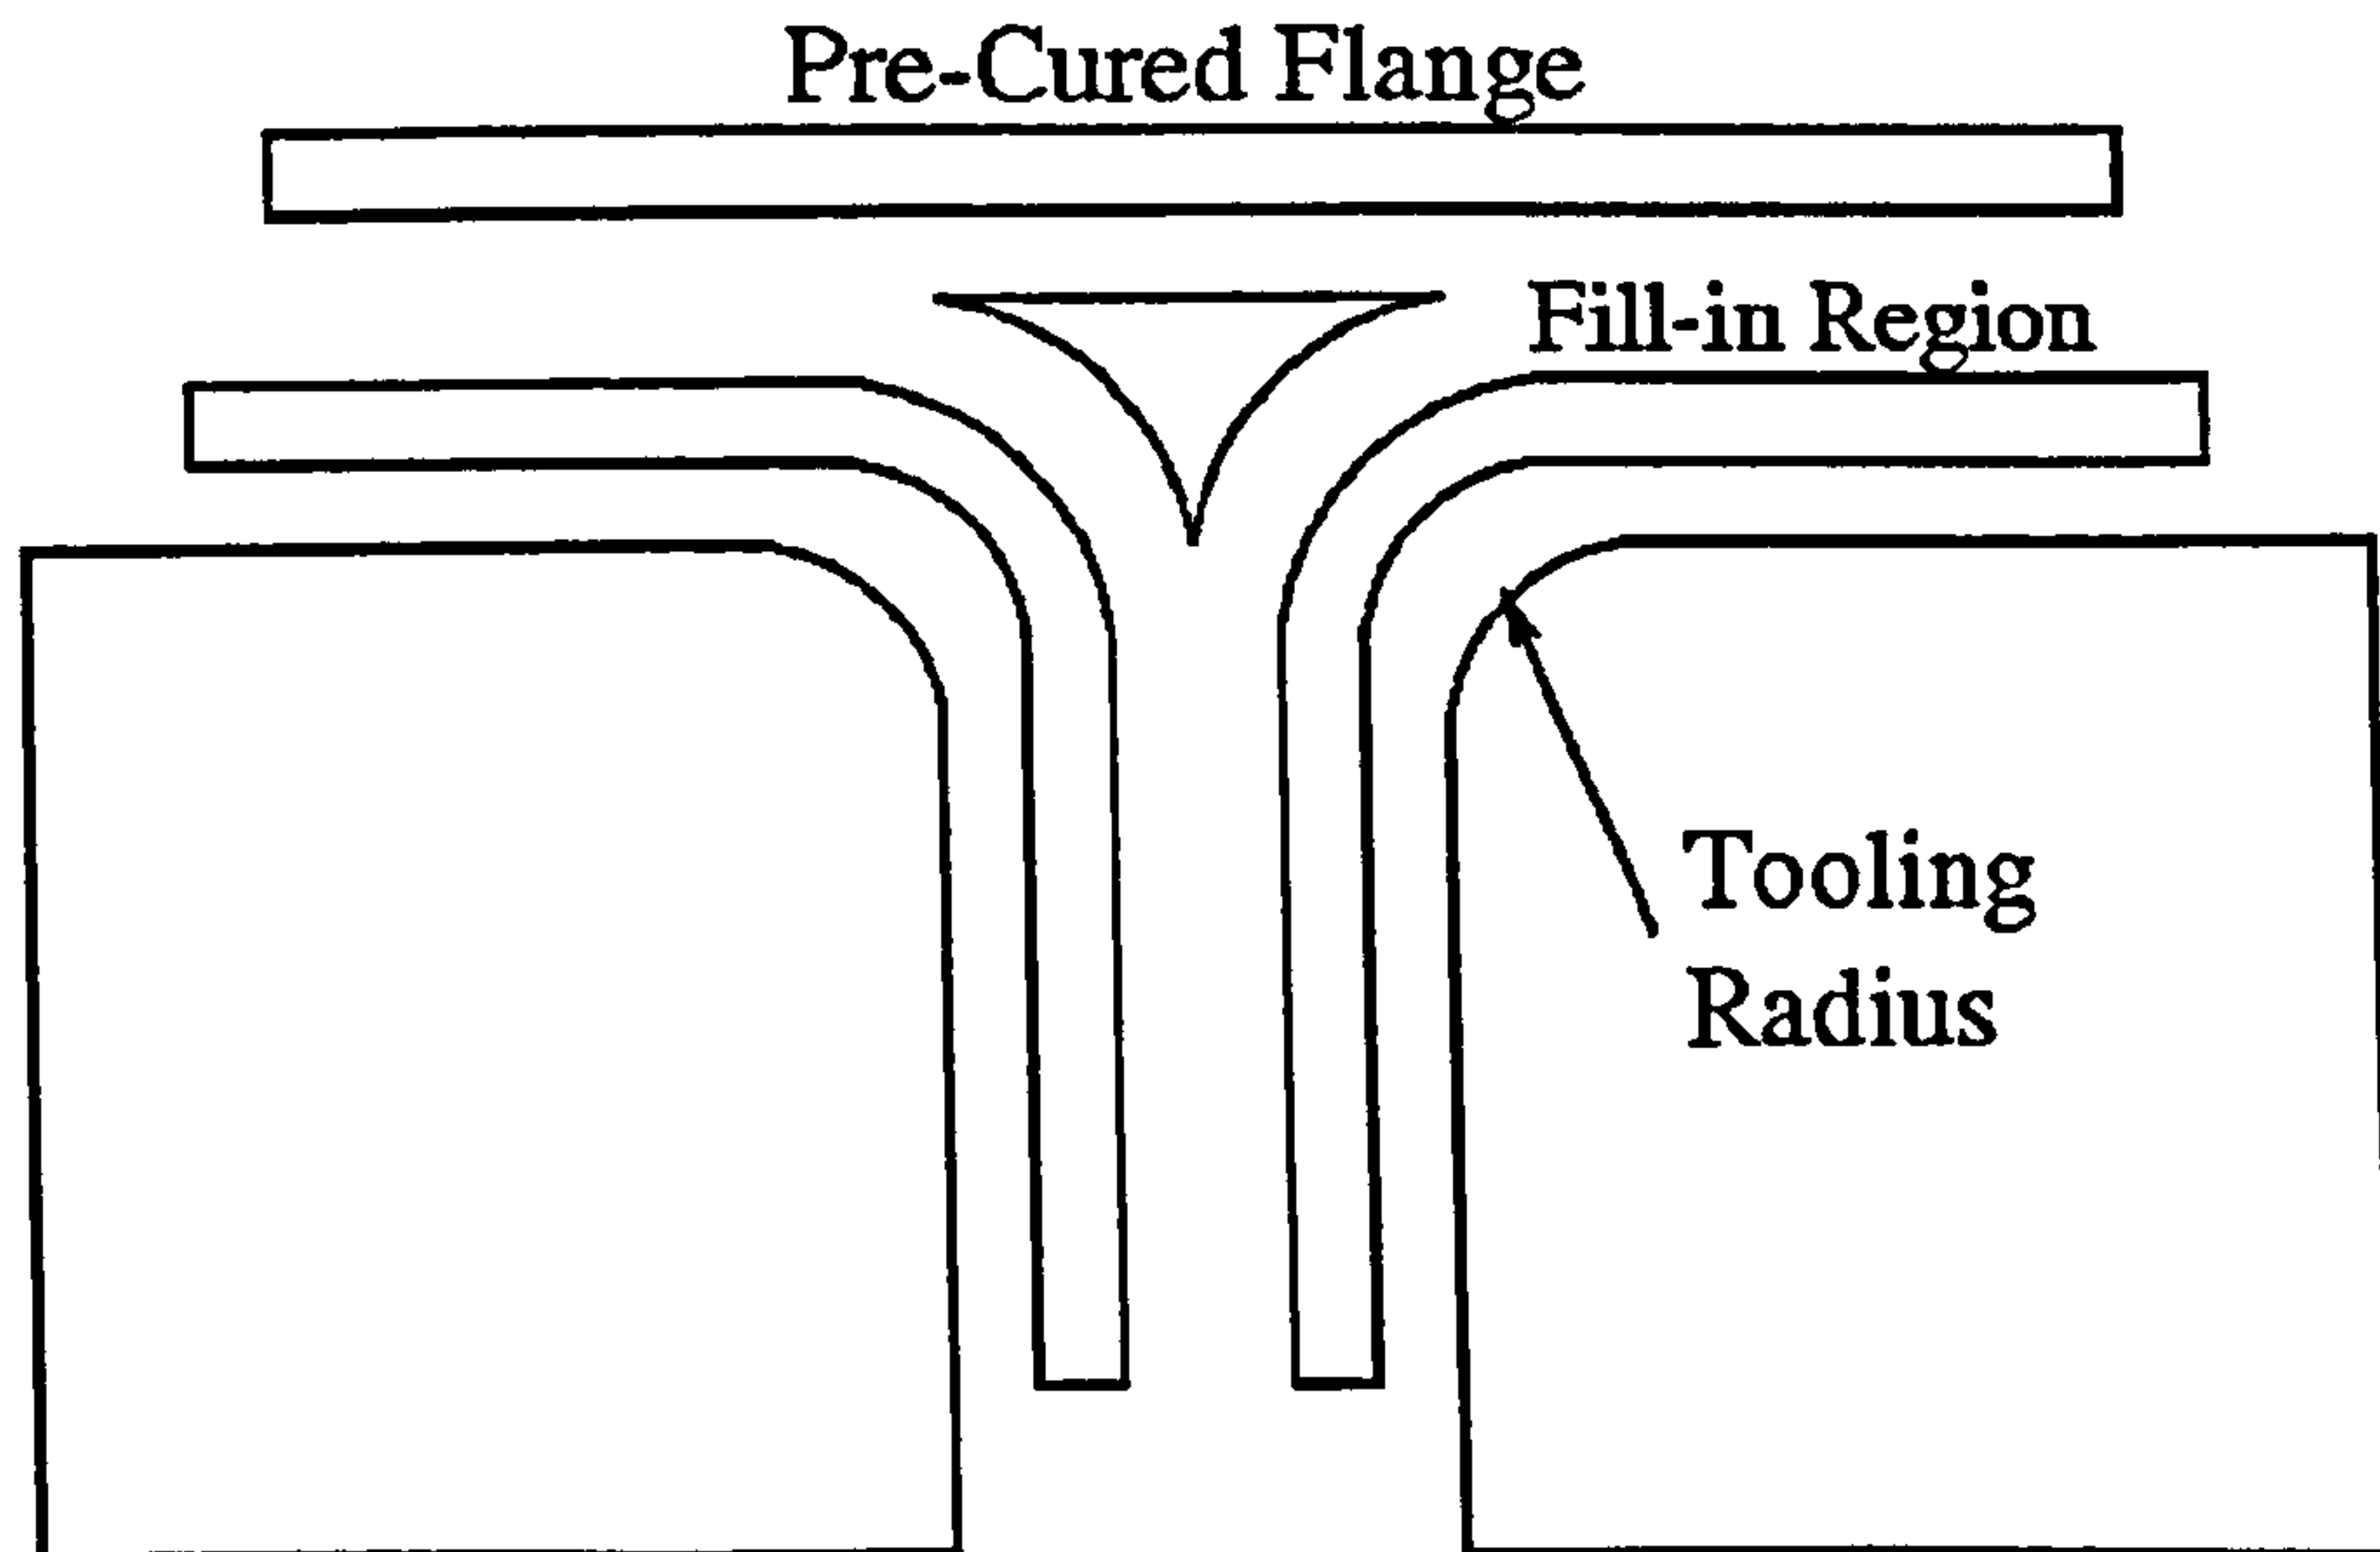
Exploded 'T'-Piece Specimen and Tooling
